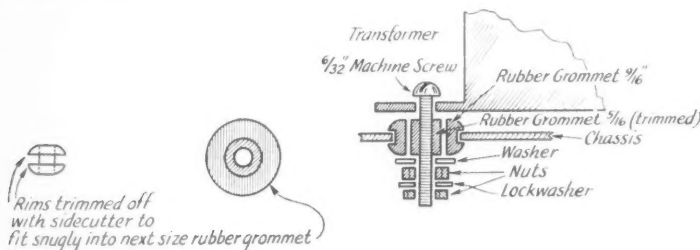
Details of floating mounting for plate transformer. The first nut should be tightened only enough to hold firmly, then locked with second nut.
